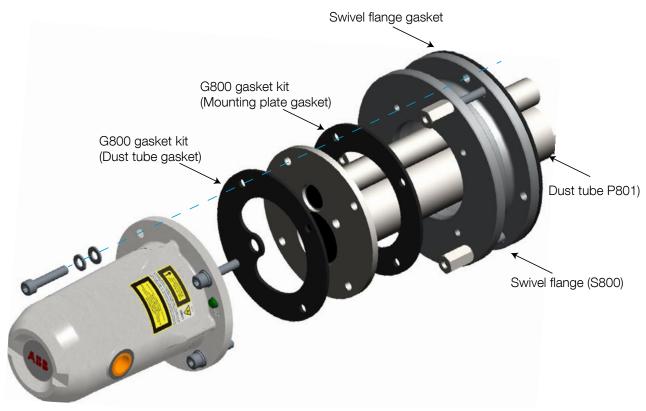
P801 Dust Tube and S800 Swivel Mounting Flange assembly
